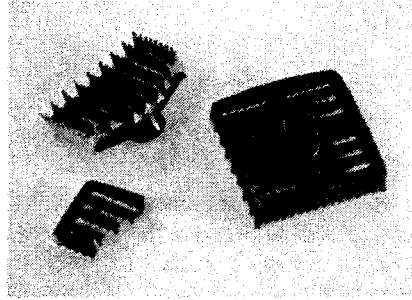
Original Casting and failed castings (*courtesy of Cleveland Engineering Ltd*)
